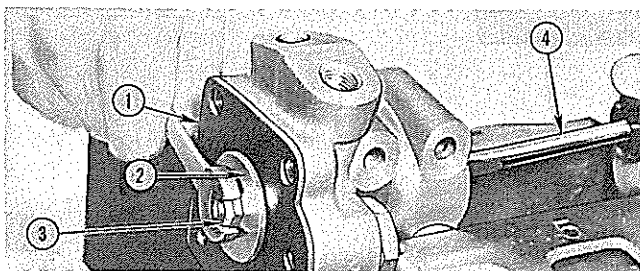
INSTALLING EMERGENCY DIAPHRAGM
